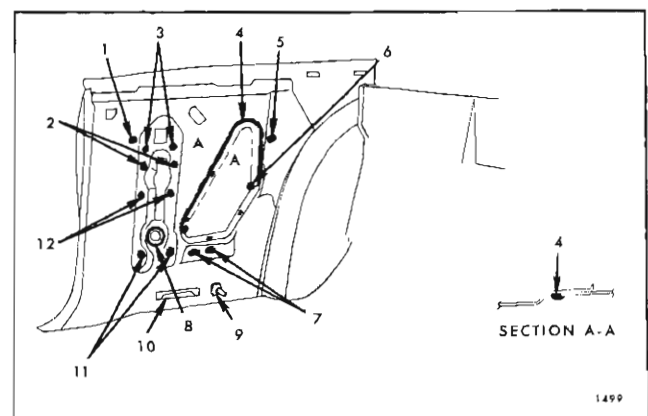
E16—Rear Quarter Inner Panel Sealing "67" Styles
